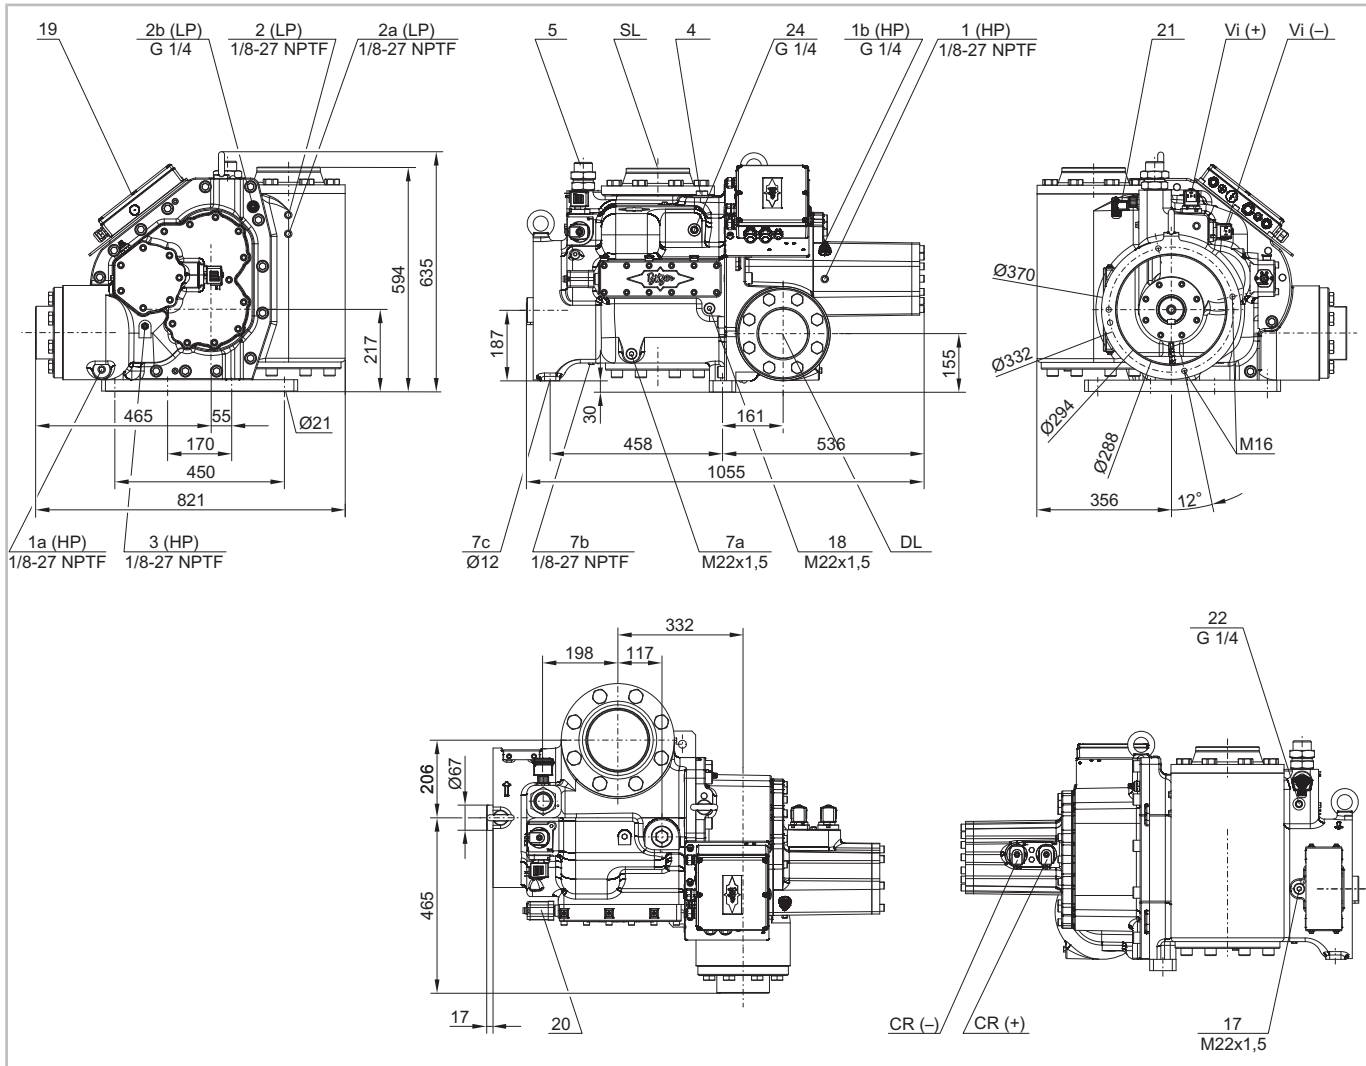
Dimensional drawing OS.A9593 .. OS.A95103
